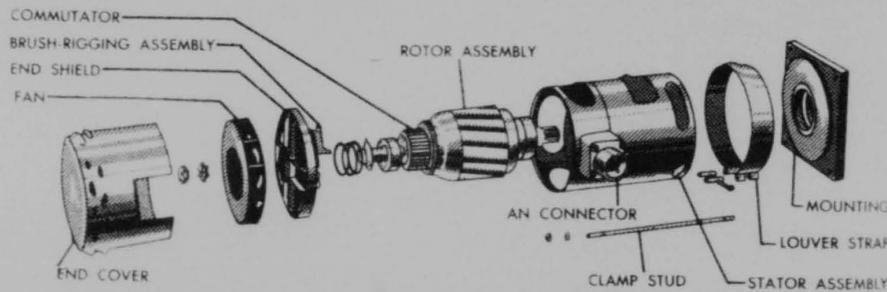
Turret-Drive Motor, Major Assemblies.
